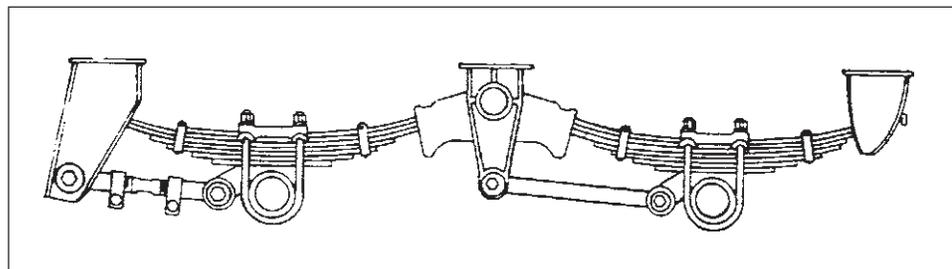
MECHANICAL SUSPENSION SYSTEM
